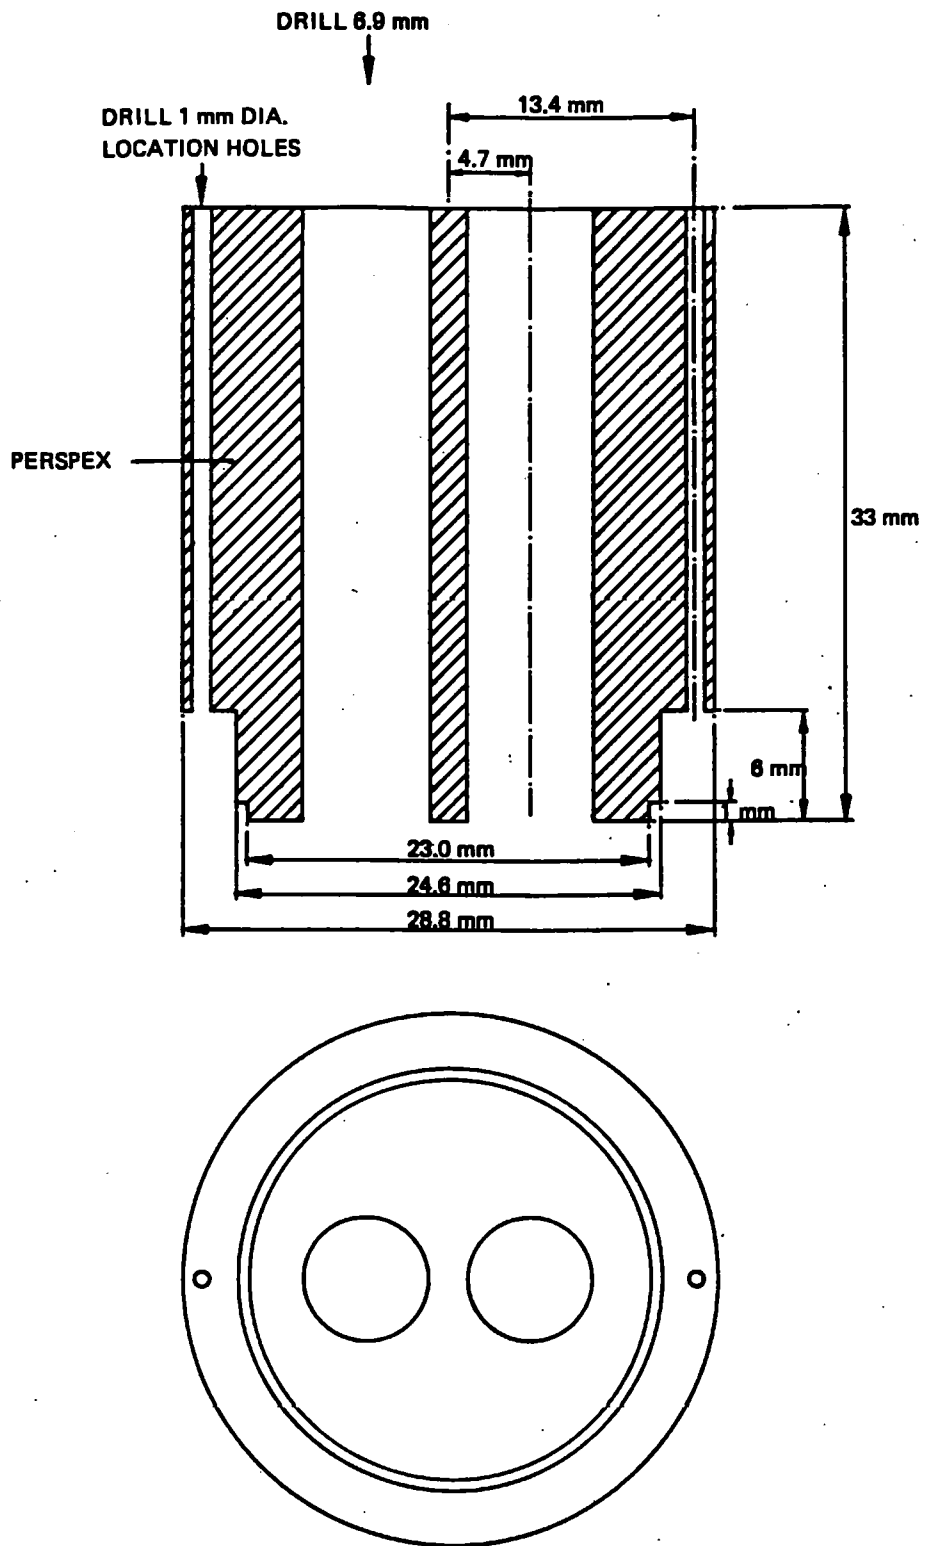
Dimensions for the guide body of the DSC pan centring tool.
